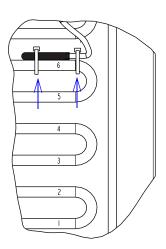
Removing evaporator temp sensor (Cut cable ties)
